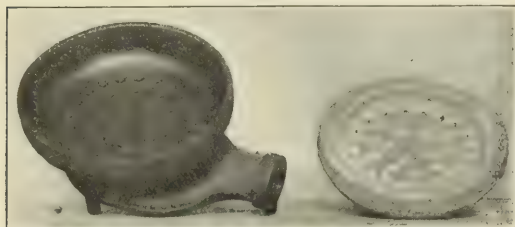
TOP VIEW OF SECOND FORM OF COOK STOVE BURNER; CASTING BEFORE DRILLING AND FIRE BRICK LINING
